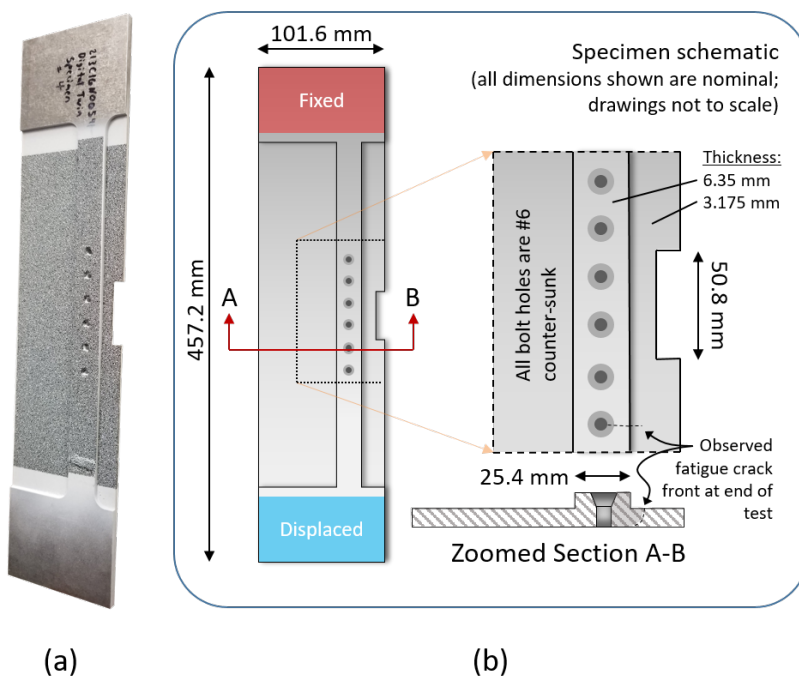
(a) Photograph and (b) diagram of the six-hole, DT specimen. The dimensions shown are measurements of the as-built specimen.
